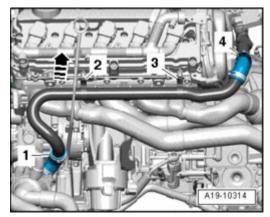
Removing Bolts, Oil Dipstick Guide Tube Upward & Loosening Hose Clamps And Removing Left Coolant Pipe From Coolant Hoses
